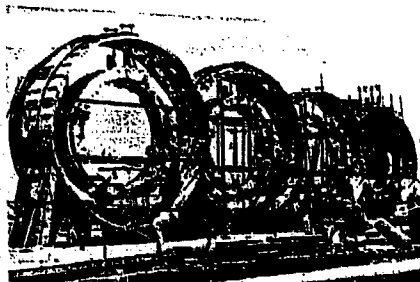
The Center Vessel is made up of six modules with two 5-m-diameter superconducting solenoid coils housed in each module. This illustration shows four of the six modules with coils and LN<sub>2</sub>-shield assembly underway in the LLNL magnet assembly yard in Livermore, California.
